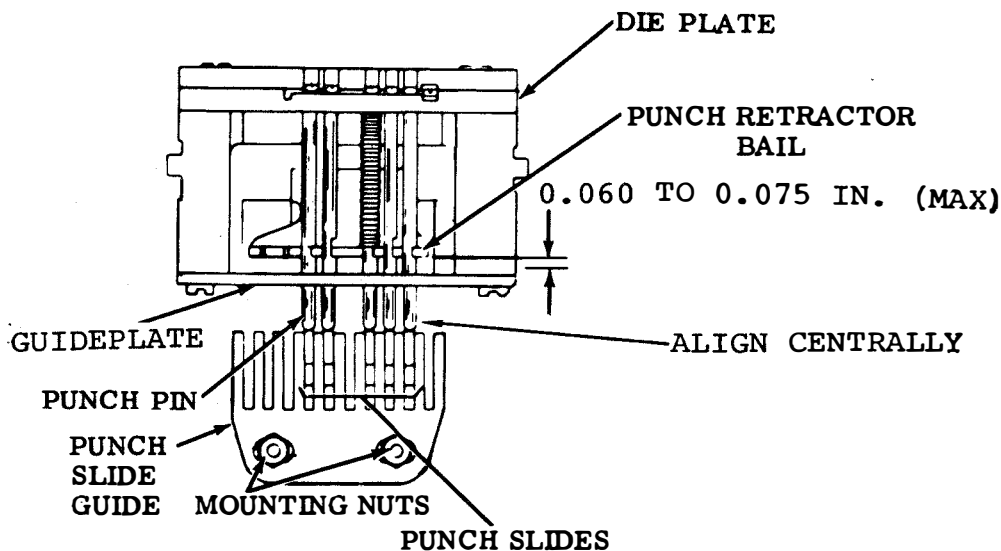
Punch Pin Penetration and Punch Slide Guide Position (Chadless Tape Mechanism)
